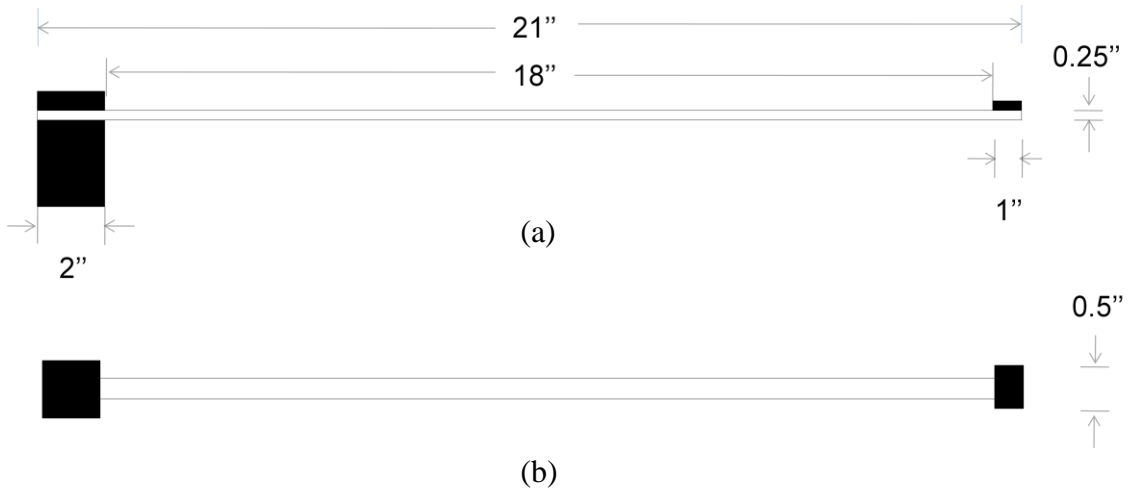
Schematic of the load bearing cantilever beam with actual dimensions.
